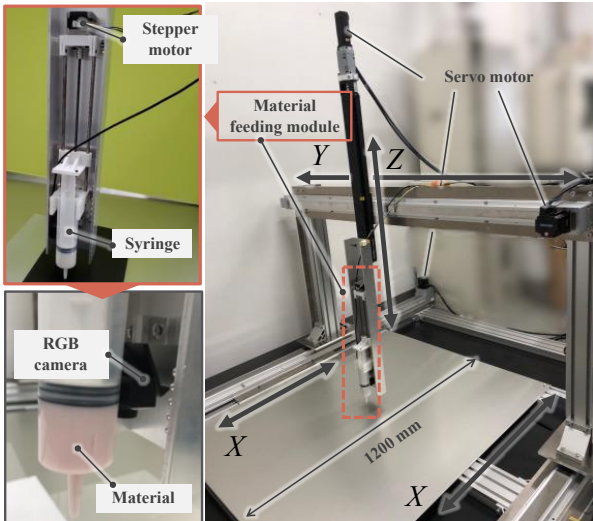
3D printing apparatus consist of XYZ actuators, a RGB camera, and material feeding module.
